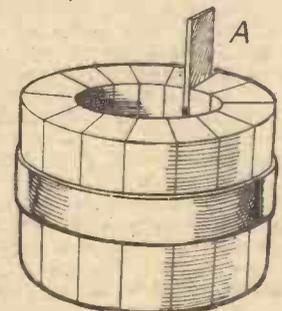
Copper bars held together by a rubber band to facilitate assembly.
